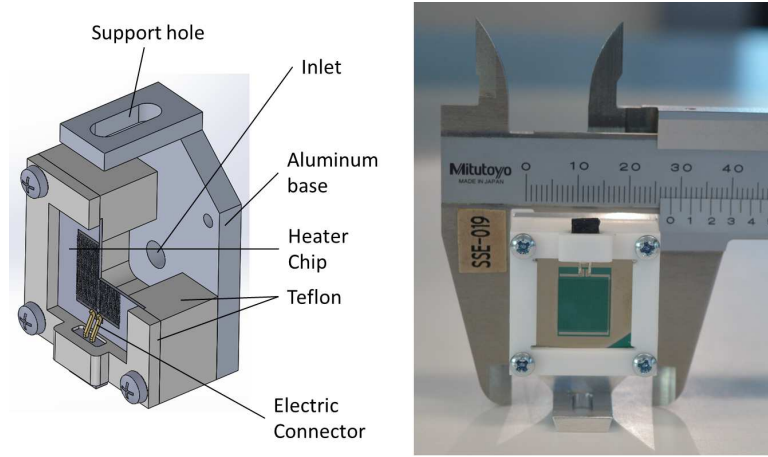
Left: sketch of the interface prototype of the thruster. Right: picture of the actual assembled prototype.
